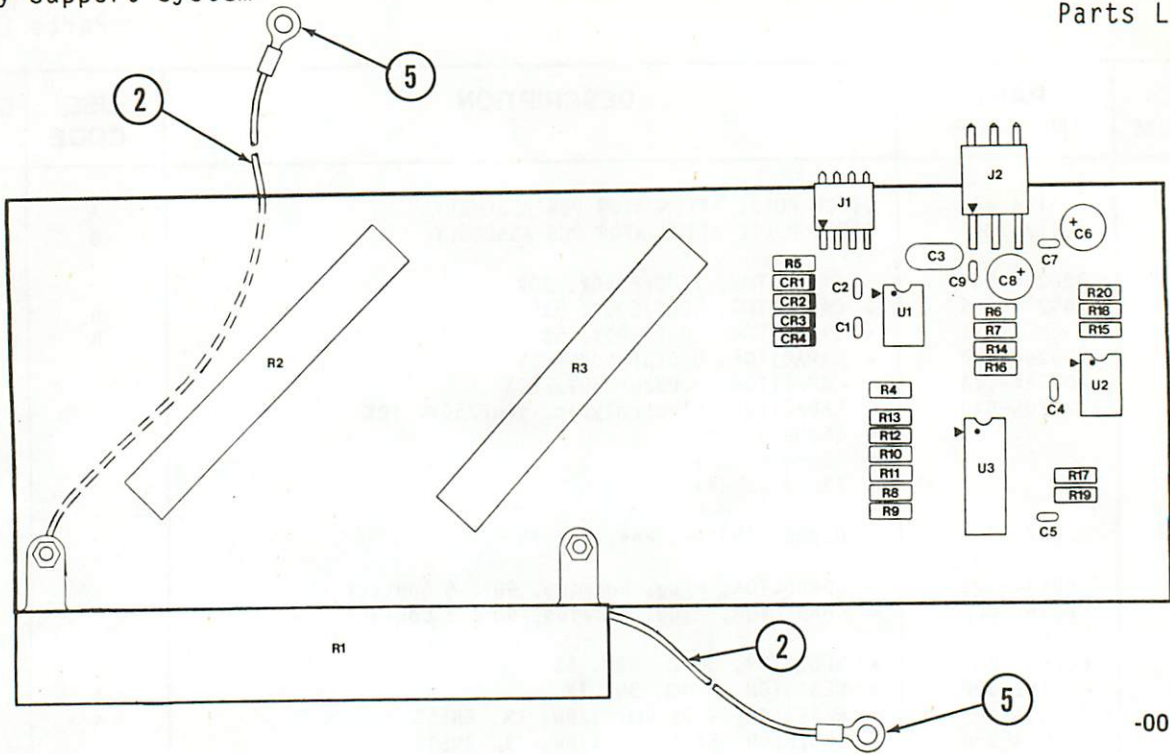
COMPUTATIONAL POWER SUPPLY PCB ASSEMBLY
